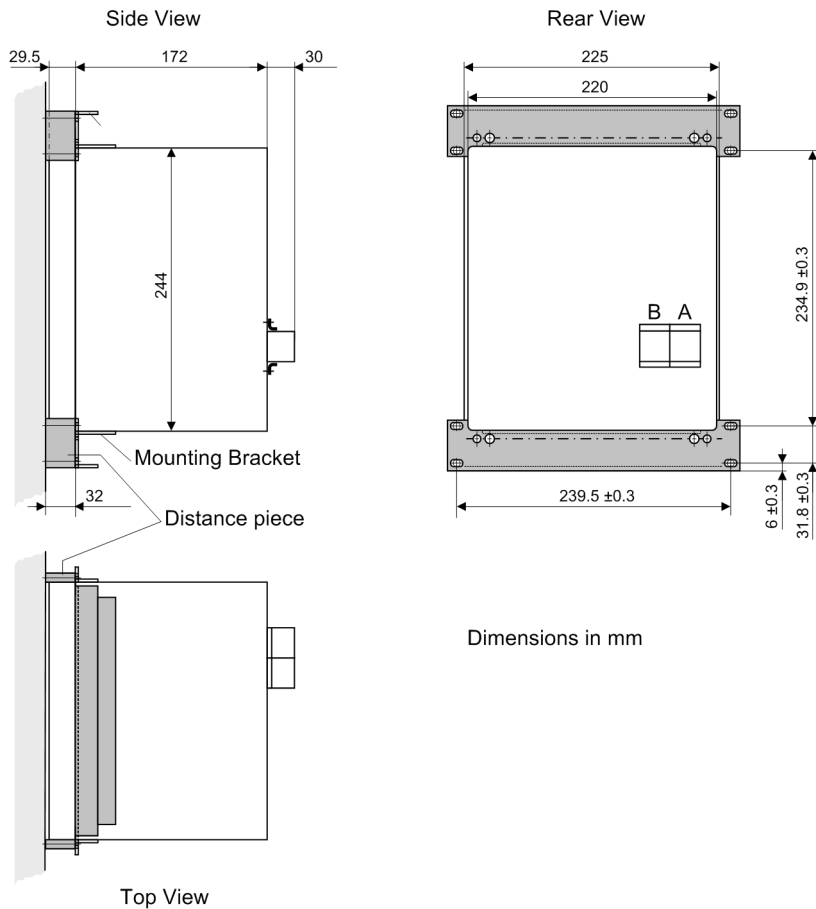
Dimensions of 20 Hz Bandpass Filter 7XT3400-0BA00 for Panel Surface Mounting
